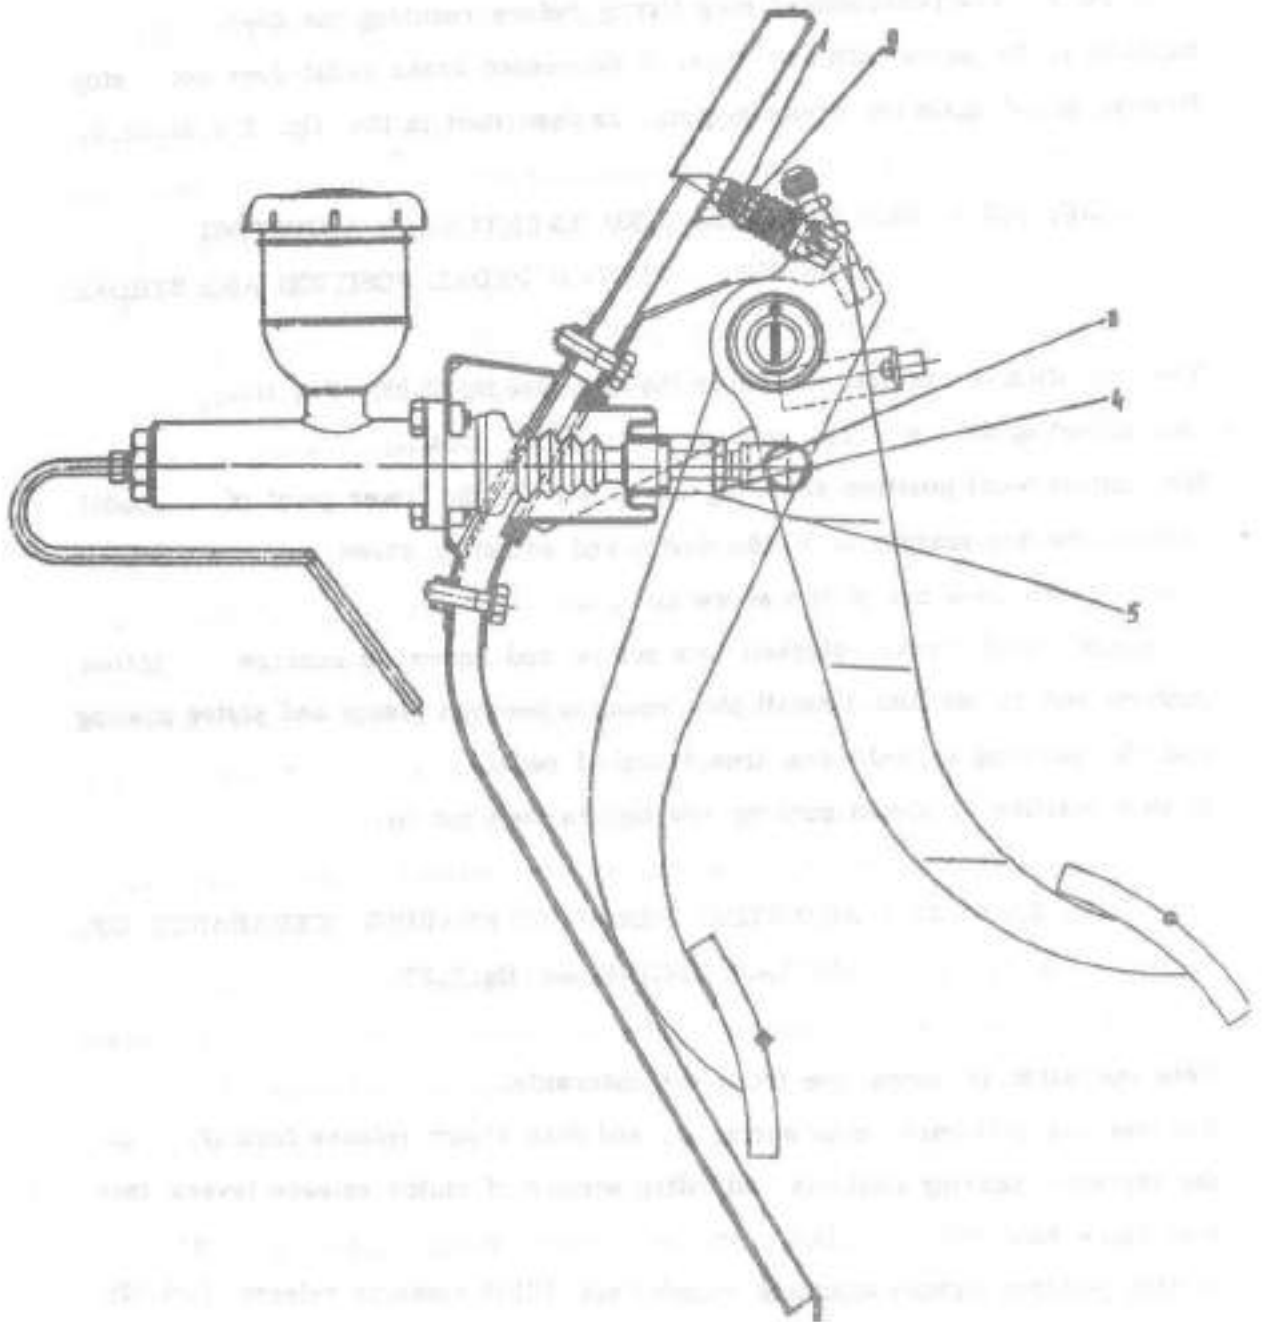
BRAKE & CLUTCH HYDRAULIC CONTROL SYSTEM
